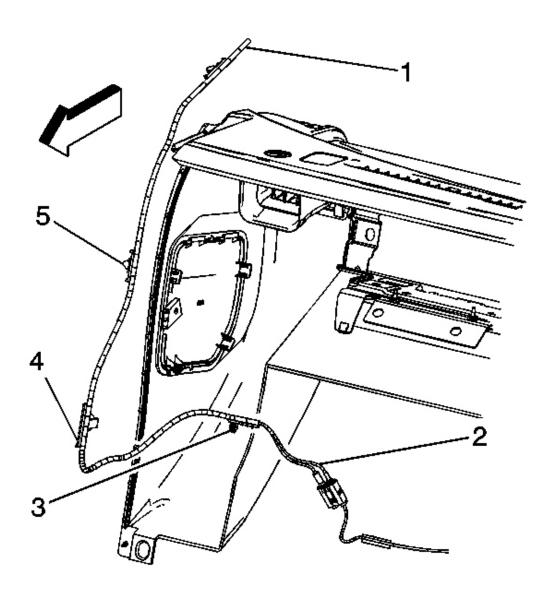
View Of Coax Cable & Components Courtesy of GENERAL MOTORS CORP.
